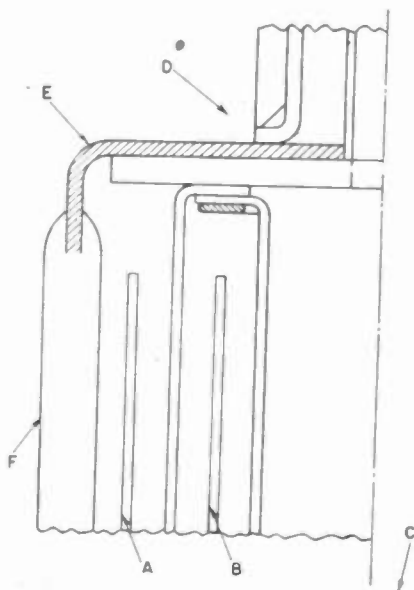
Enlarged cross section of hot end of GL-1L38.
